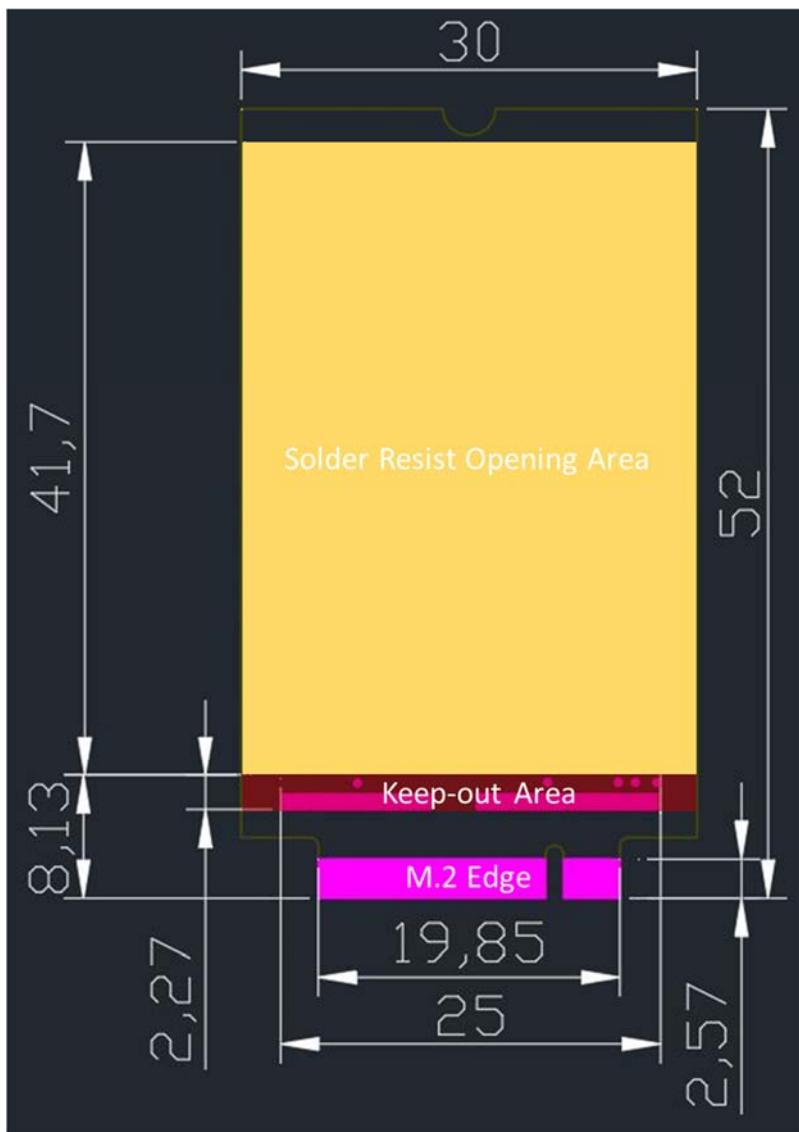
Solder Resist Opening Area and Keep Out Area on Bottom Side
